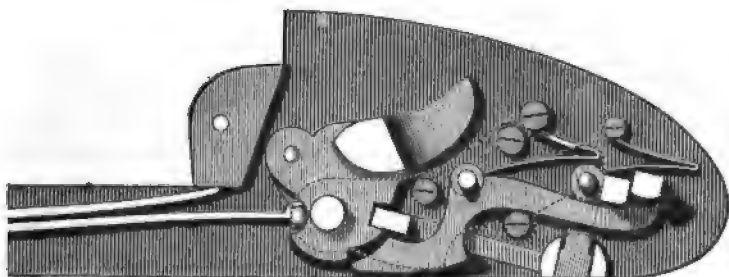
THE SAME LOCK, BLOCKED—THE BRIDLE REMOVED (full size).
